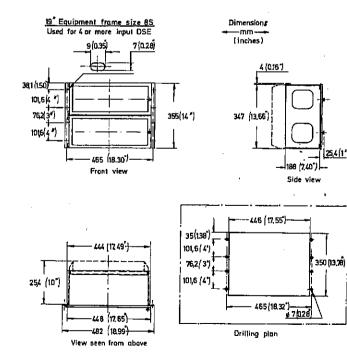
Physical dimensions of DSE, panel drilling and cut-out.
